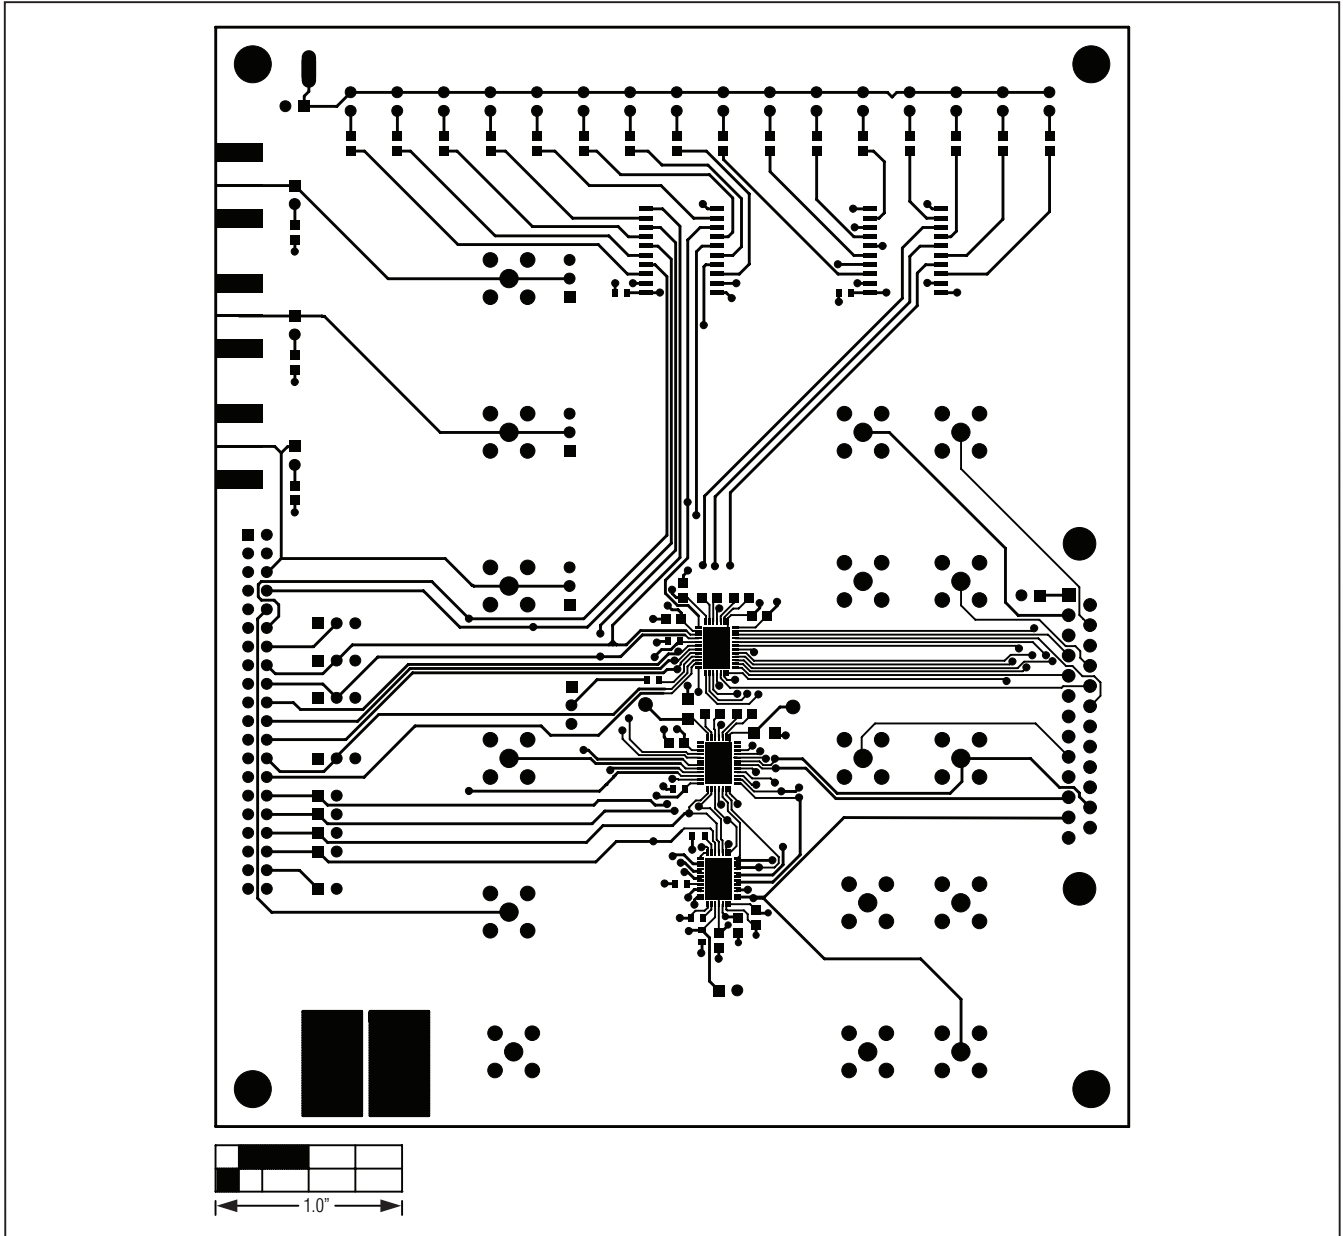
MAX13171E/MAX13173E/MAX13175E EV Kit PCB Layout—Component Side
